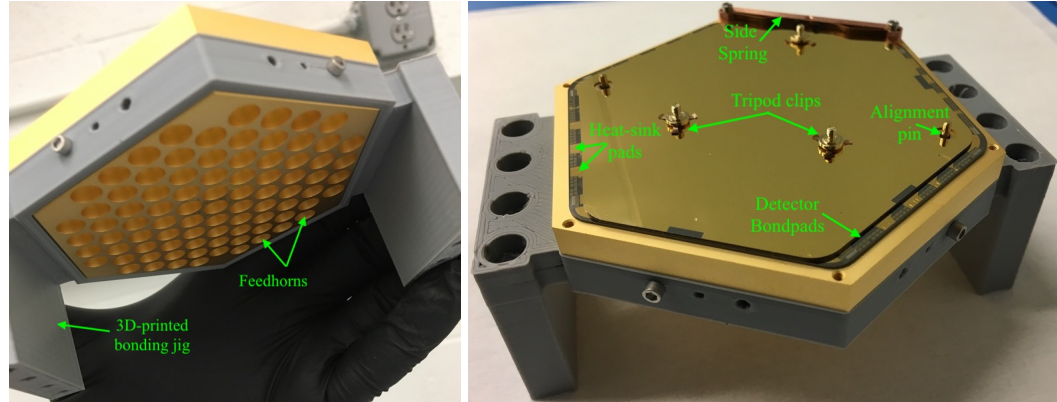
Feedhorn and Detector Wafer Assembly: The CLASS HF module assembly begins by assembling the Au-plated CE7 feedhorn array and the hybridized detector wafer assembly. (Left) First, we mount the feedhorn array on a 3D-printed jig that mechanically supports the feedhorn array and can be mounted on a wirebonder. (Right) The wafer assembly is then mounted on the feedhorn array using three BeCu tripod clips. Each clip is deflected by ~ 0.5 mm using a custom-made screw, which puts sufficient force on the wafer to keep it stationary and ensures proper operation of the photonic choke-joints. Since the screws have #1-64 threads, a one and a quarter turn of the screw head after it comes in contact with the tripod clip provides the desired 0.5 mm deflection. The two alignment pins and a BeCu side spring maintain proper alignment of the feedhorn waveguides to the OMTs on the detector wafer. The two square alignment holes on the wafer assembly are designed such that the alignment is achieved when one of the pins is pushed against a corner of the square (locking the wafer from sliding across that point) and the other pin is pushed against a side of the square (locking the wafer from rotating about that point). This entire assembly is then mounted on a wirebonder. Next, a series of Au wirebonds are put down to thermally connect the heat-sink pads on the detector wafer and the top of the backshort to the CE7.
